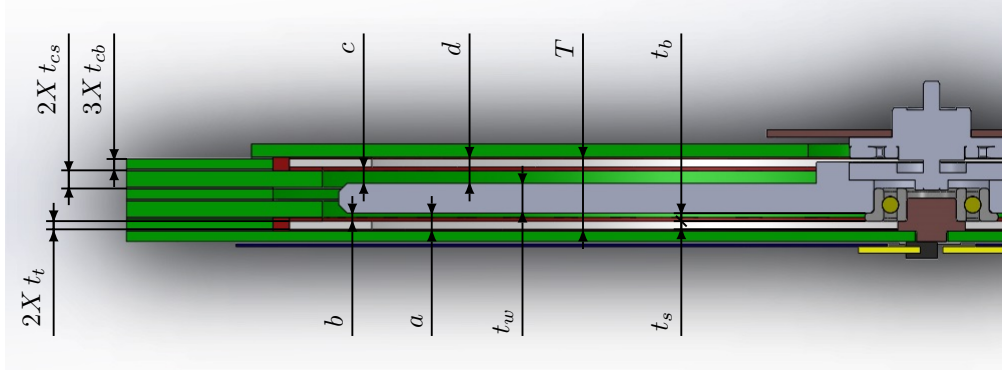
Tile version 2 dimensions for tolerancing.
